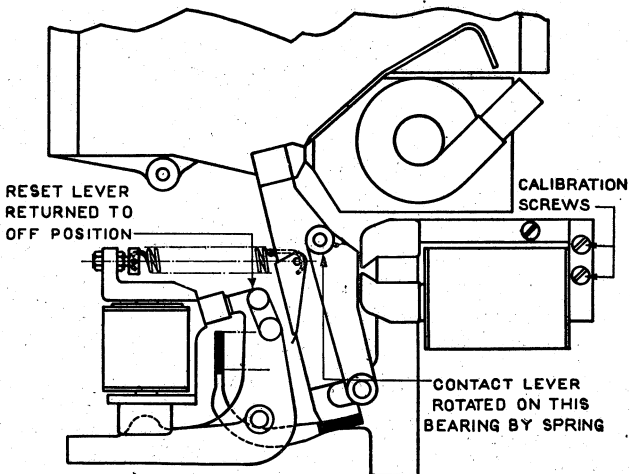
4th Stage—Closing mechanism retracted ; breaker contacts closed.
